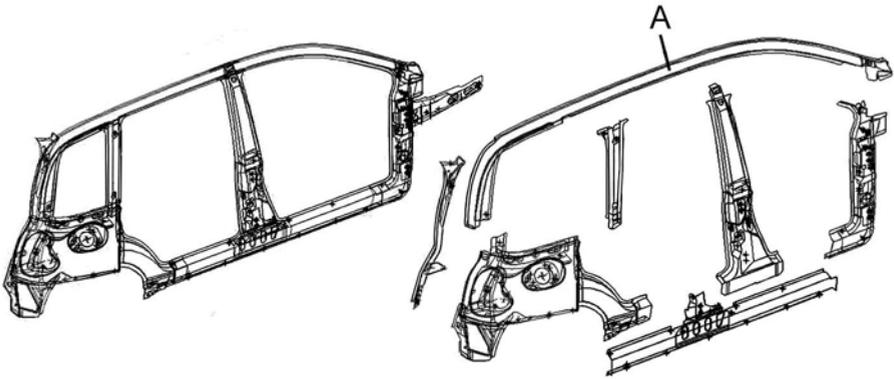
Fiat Multipla body side is assembled from a number of stamped parts and rolled steel profiles (A).
